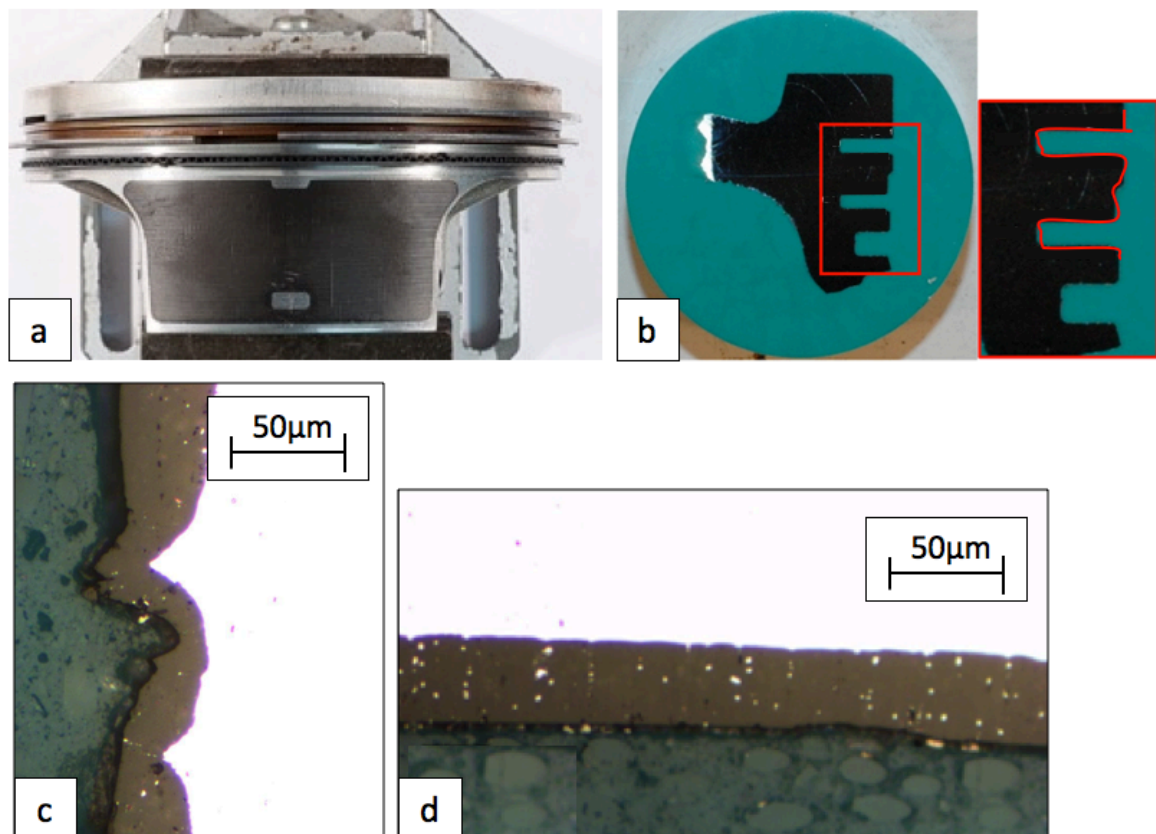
Images of piston equipmenting Ducati Multistrada 1200 engine: a) piston macrograph, revealing the presence of piston skirt coating; b) OM metallographic section of piston lands, where hard anodizing covers both 1st and 2nd ring groove as highlighted in red; c) and d) OM micrographs showing the presence of thick anodizing layer ($\approx 25\mu\text{m}$).
